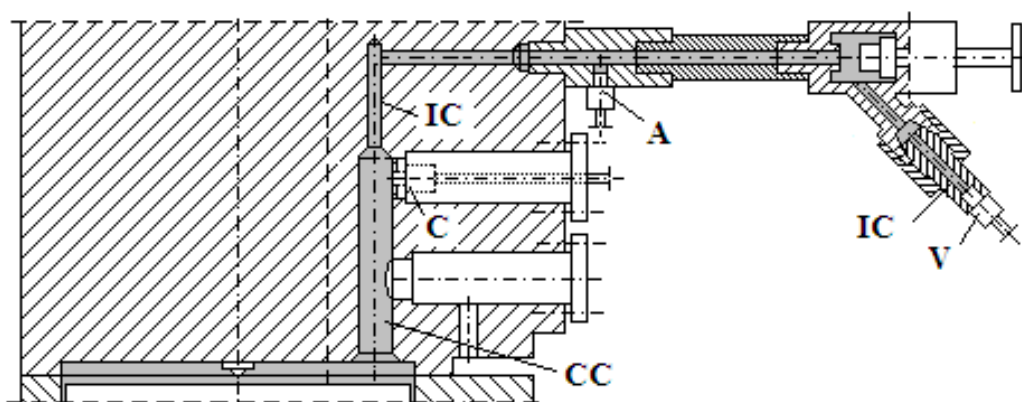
The design of the gas channel, pressure sensors location of the test engine Al 25/30: CC – cylinder channel, IC – indicator channel, C - pressure sensor location in the cylinder, A - pressure sensor location in the adapter Kistler 7523A10, V - pressure sensor location on the indicator valve
